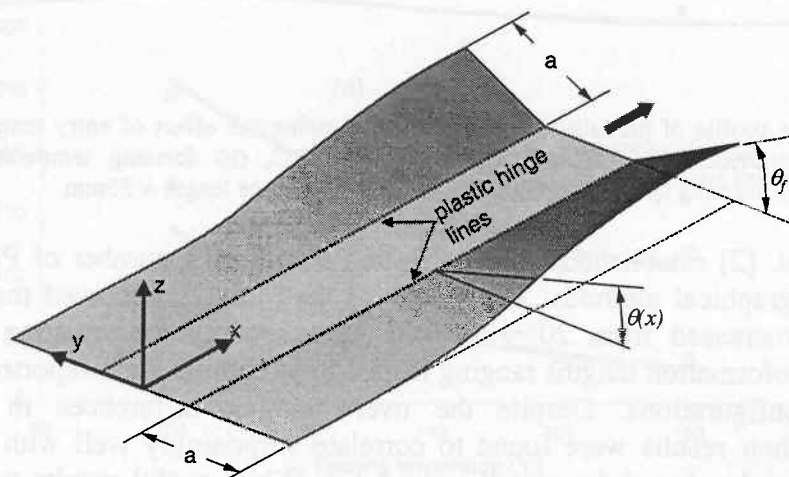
Deformed surface typically encountered in roll forming of metallic sheet.
